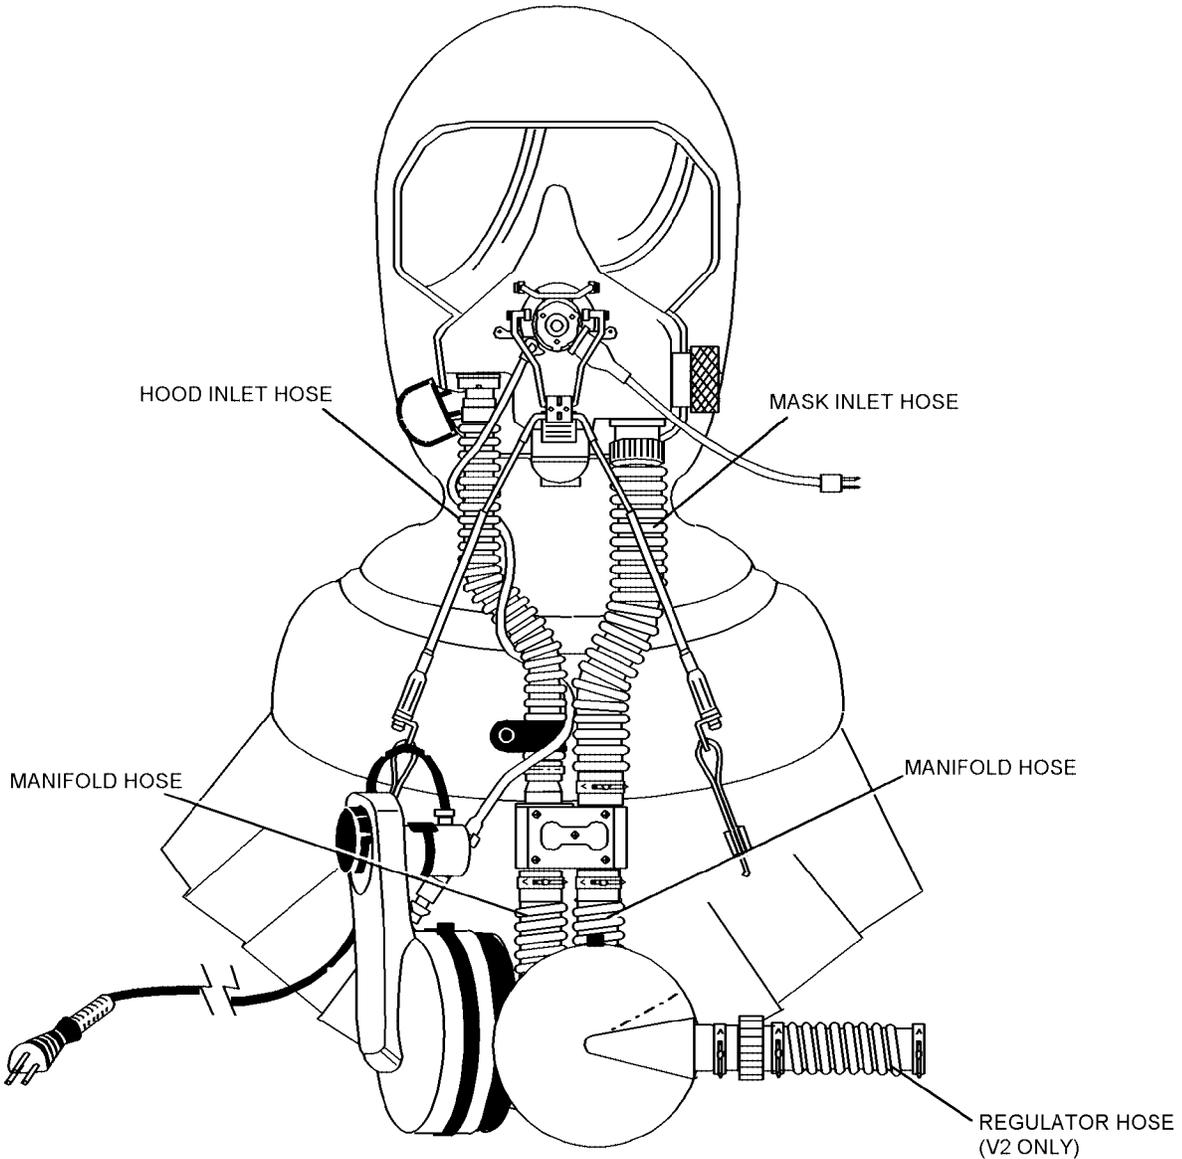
Respirator Assembly ((V)2 Variant Shown)
